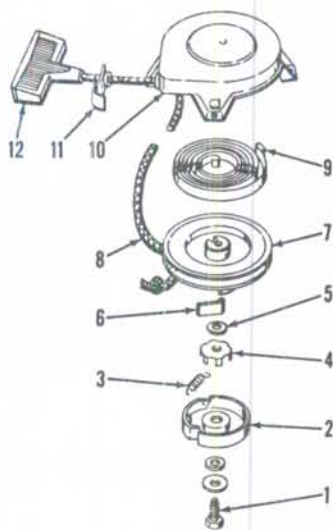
Exploded view of recoil starter typical of that used on most models.
